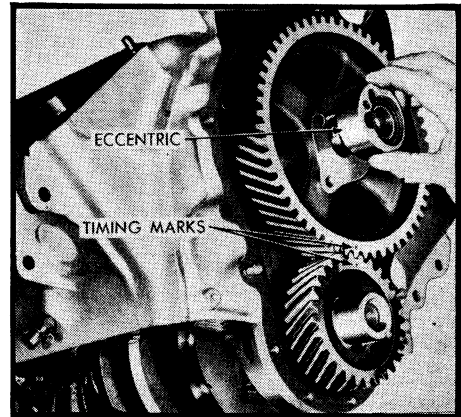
Valve timing on V8 gear-driven engines. View shows fuel pump eccentric being installed
